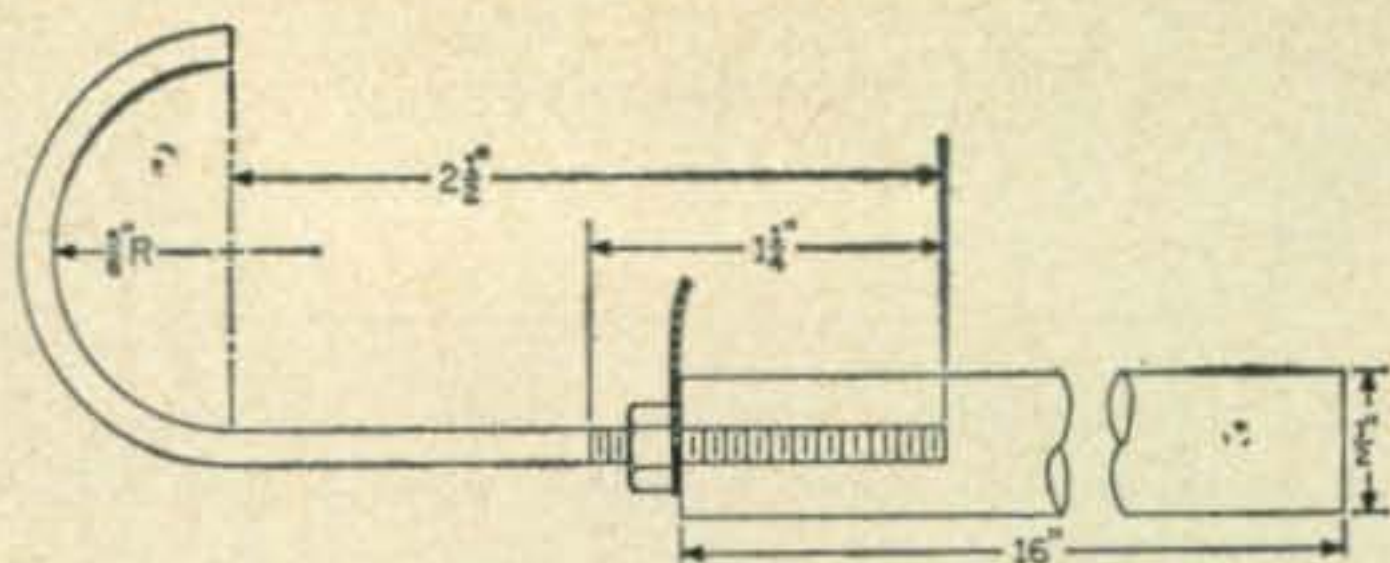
Construction details for a safety hook. The hook end is formed of #10 copper wire with a 6-32 thread on the straight end. This end is threaded into a 1/2" diameter, 16" long bakelite or birch rod. The braid may be secured under the knut or solder to the hook.
